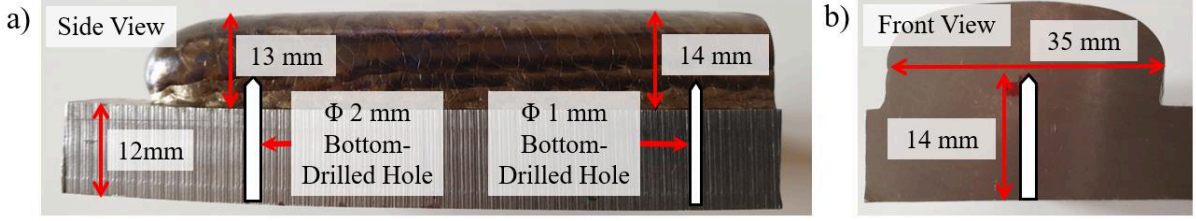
(a) Side view and (b) front view of a WAAM Ti-64 component deposited using oscillation strategy and containing fabricated calibration bottom-drilled holes of 1 mm and 2 mm in diameter
